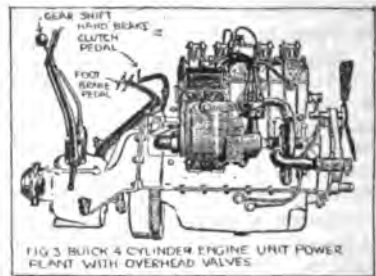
BUICK 4 CYLINDER ENGINE UNIT POWER PLANT WITH OVERHEAD VALVES.
